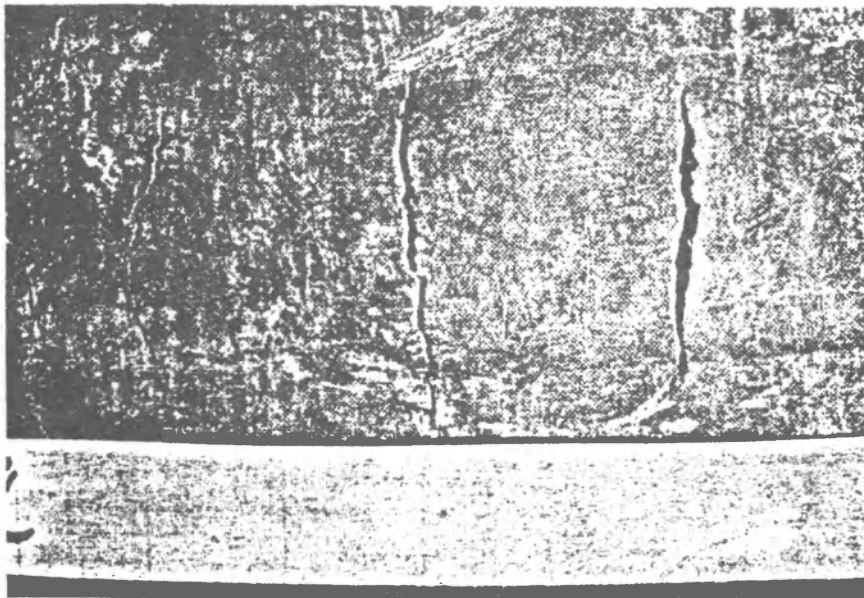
Creep rupture failure in machined shell butt weld of experimental mild steel pressure vessel welded with mild steel electrode after 1800 hr at 450°C under pressure producing 2.8% membrane creep strain.
